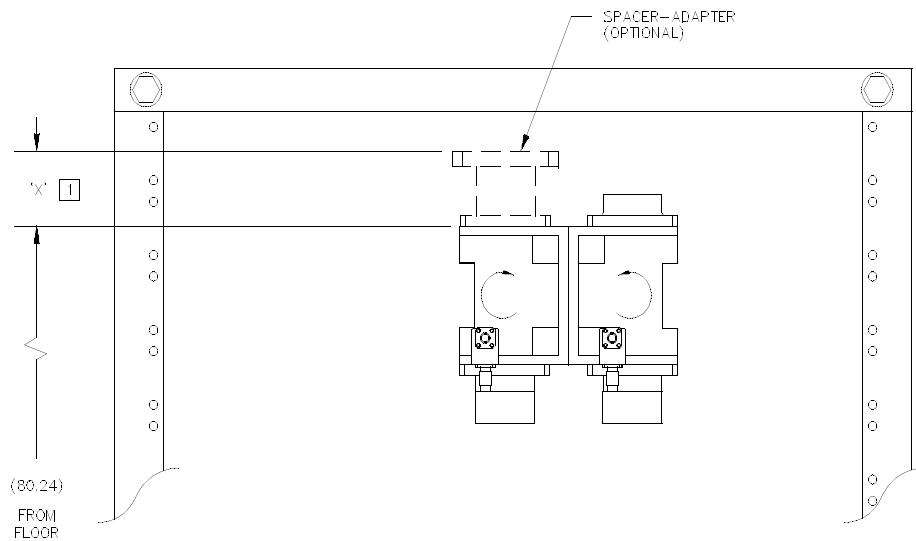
ACU, nonprotected (front view), mechanical drawing
